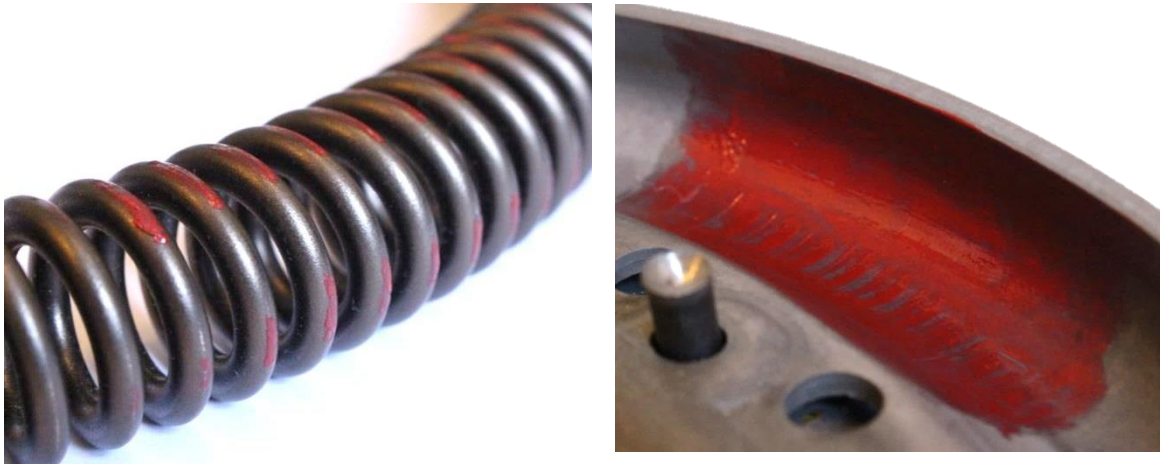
Assessing outer spring contact with its housing (secondary inertia)
